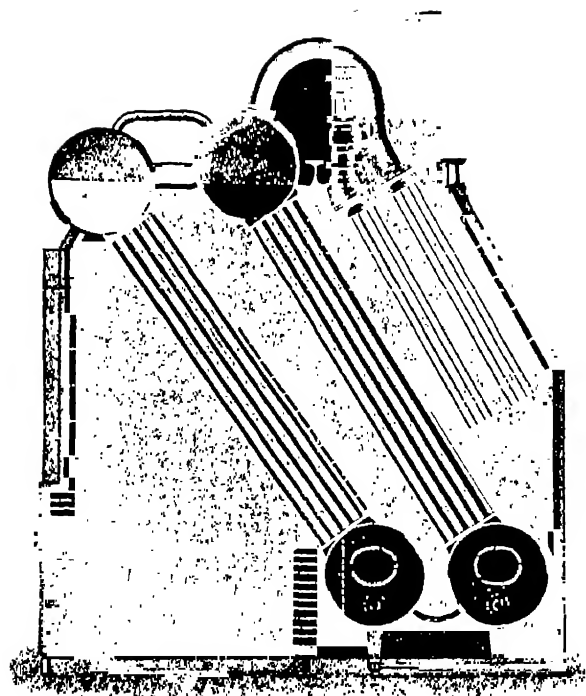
Marine-type Water-tube Boiler with Superheater
